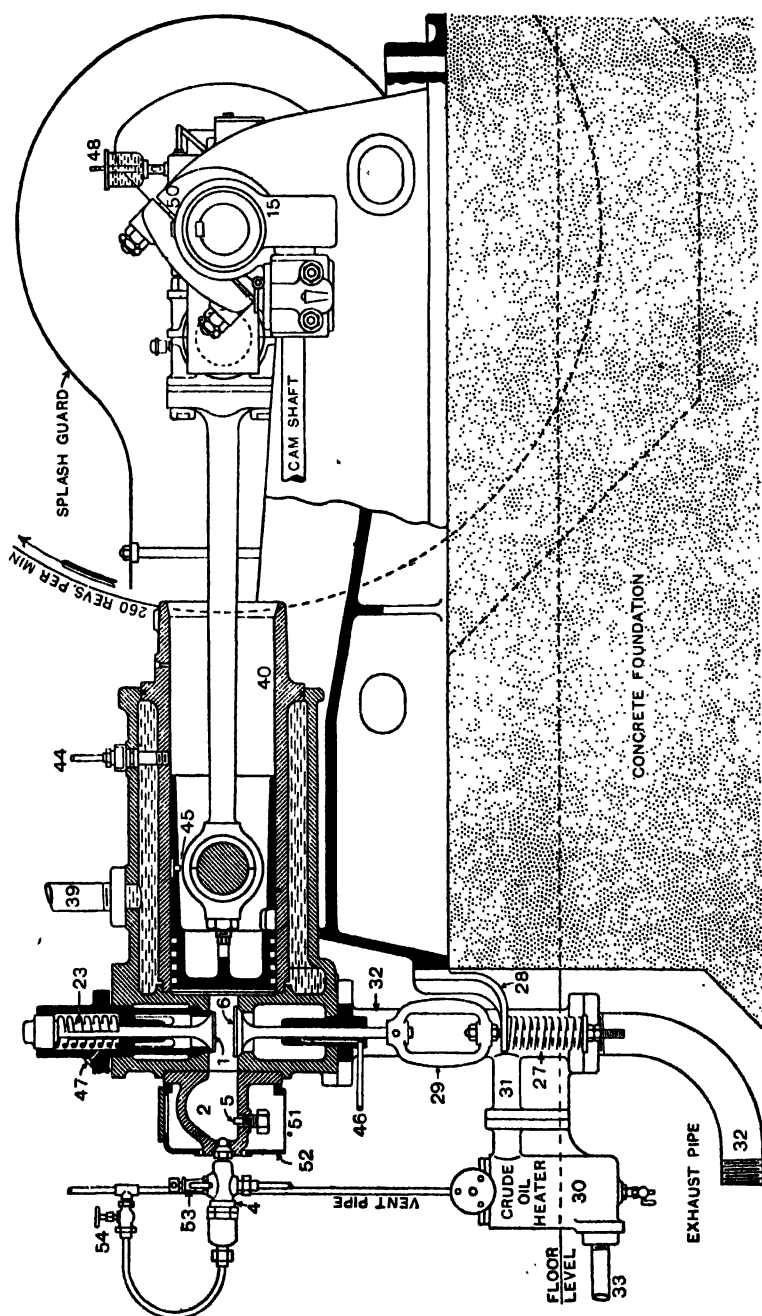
The Campbell high compression oil engine. Sectional elevation.
